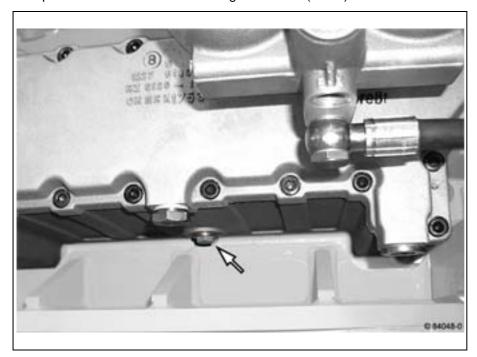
Lube oil heat exchanger on the cylinder row B (right hand side)
